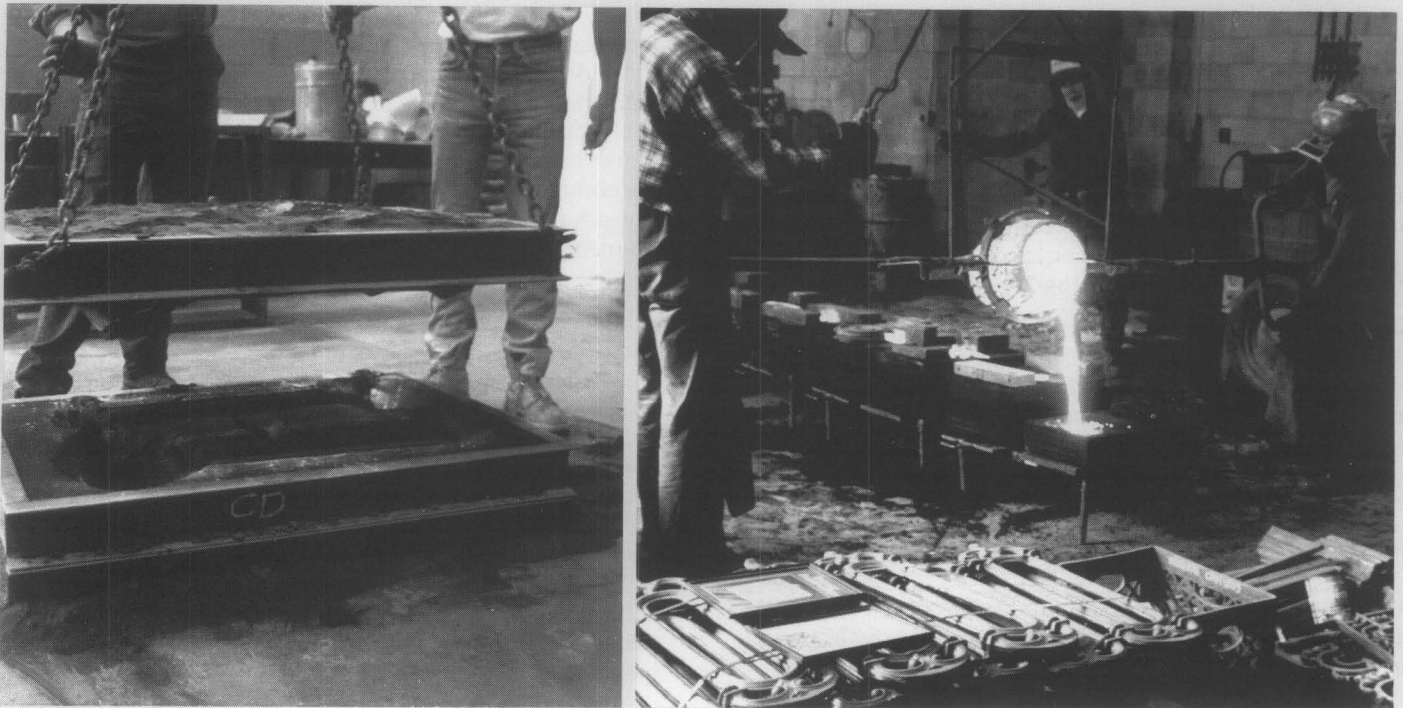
(a) A two-part mold, consisting of a cope (top) and drag (bottom) for a newel post. Photo: Architectural Iron Company, Inc. (b) Molten iron being poured into a mold containing sand at a foundry. The iron casting process has changed little in the past two centuries. Photo: Karen Huebner.
